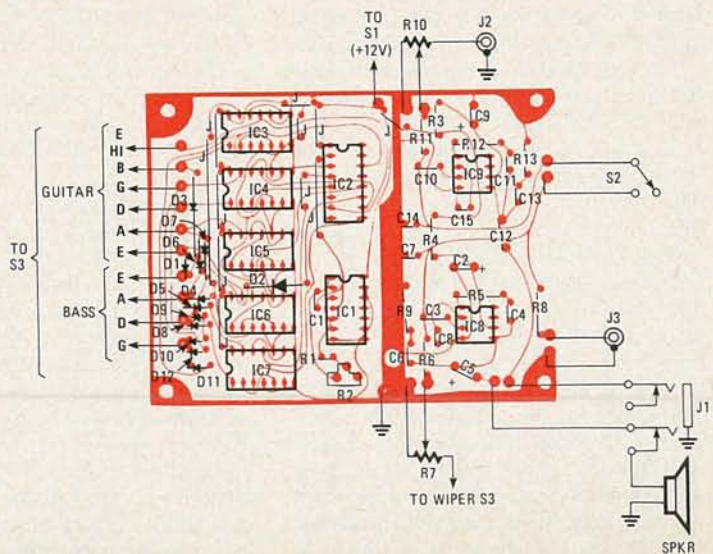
DO NOT FORGET to install the 11 jumper wires on the component side of the board.
